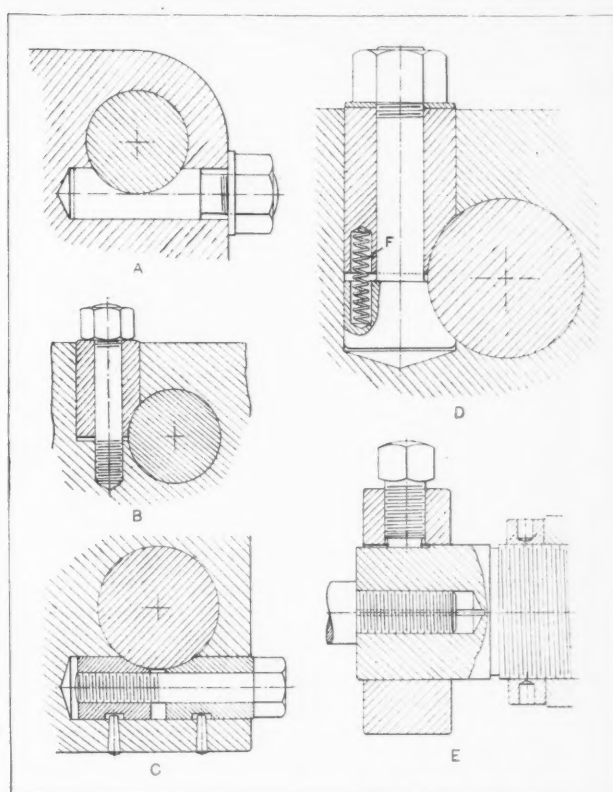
Various Arrangements of Clamping Bolts of the Pad or Binder Type
